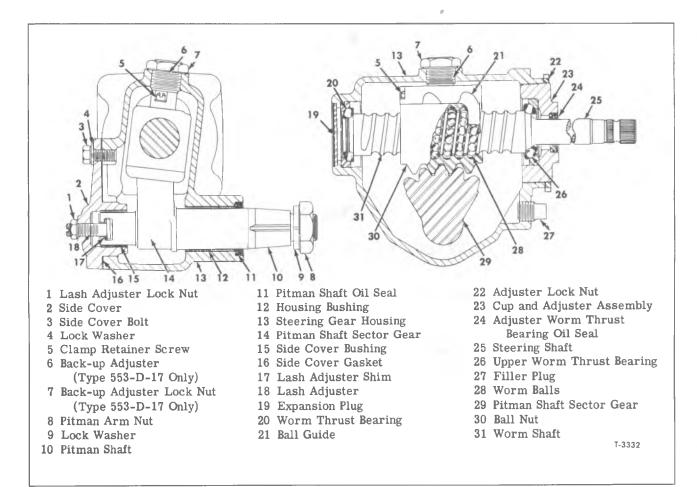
Type 549-D and 553-D Steering Gear (Typical)
